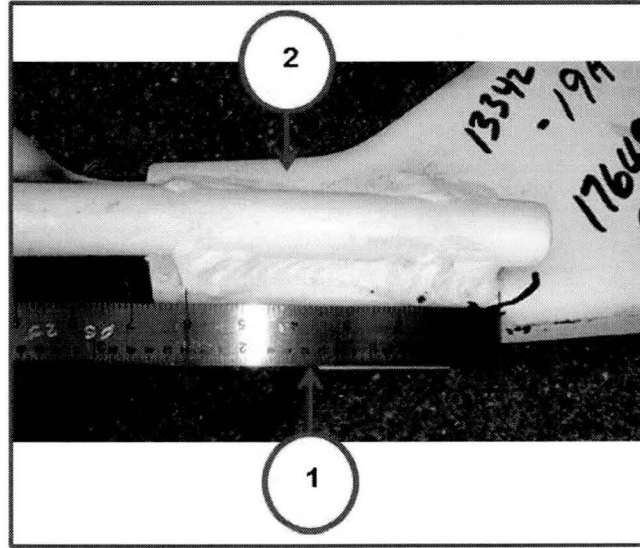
Reinforce Weld to a Length of 60mm
